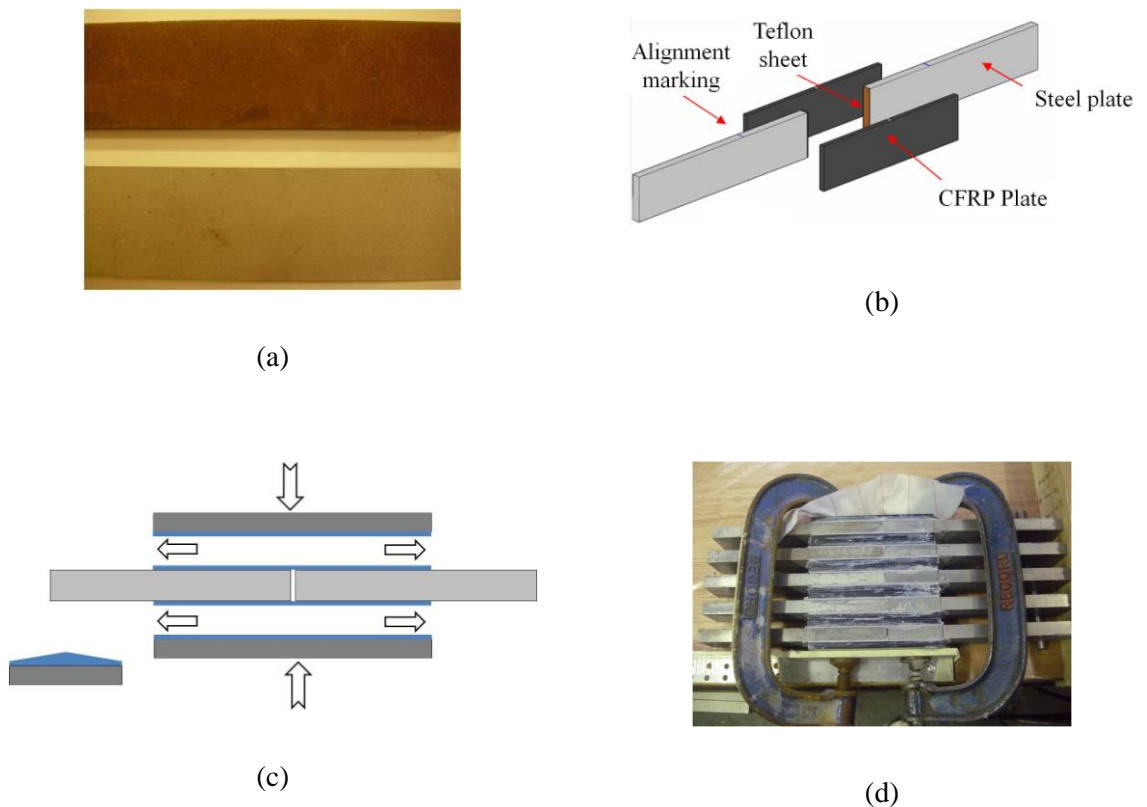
Double-lap shear specimen fabrication processes: (a) steel plate before and after grit blasted, (b) marking and alignment, (c) adhesive application and (d) clamping and curing.
